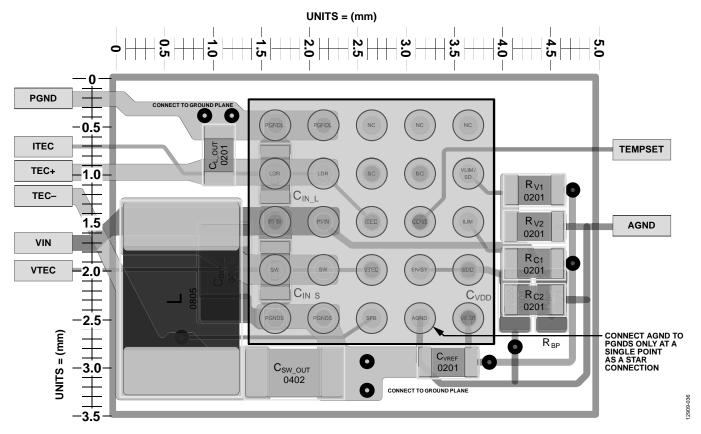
Example PCB Layout Using Two Layers (Top and Bottom Layers)
